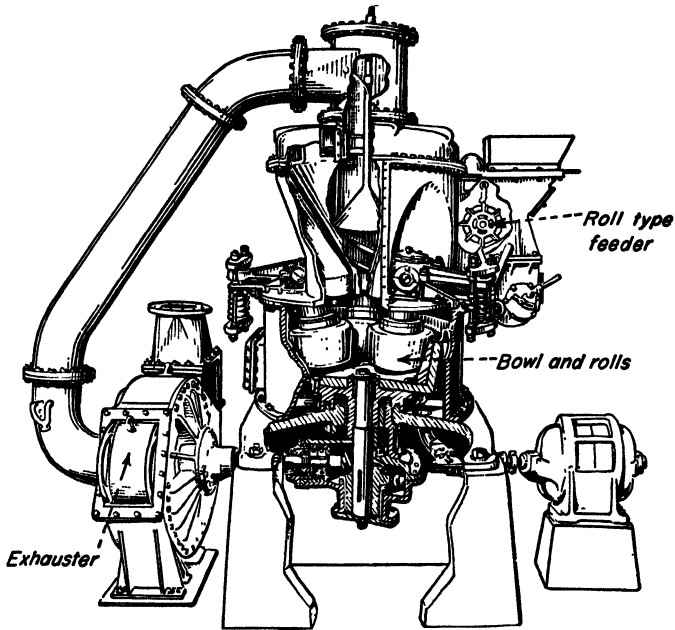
Bowl-type roller mill. ("Combustion Engineering," 1st ed., p. 7-24.)
